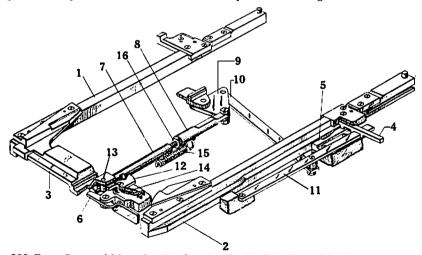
Front Removal Magazine Carriage for Double Distributor Machines. The carriage is released by lever 6 and links shown. The magazine is supported by the carriage until fully forward, at which point the magazine can be removed with ease and speed.
